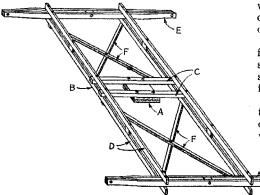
MECHANICAL DETAILS OF THE SUP PORTING STRUCTURE
